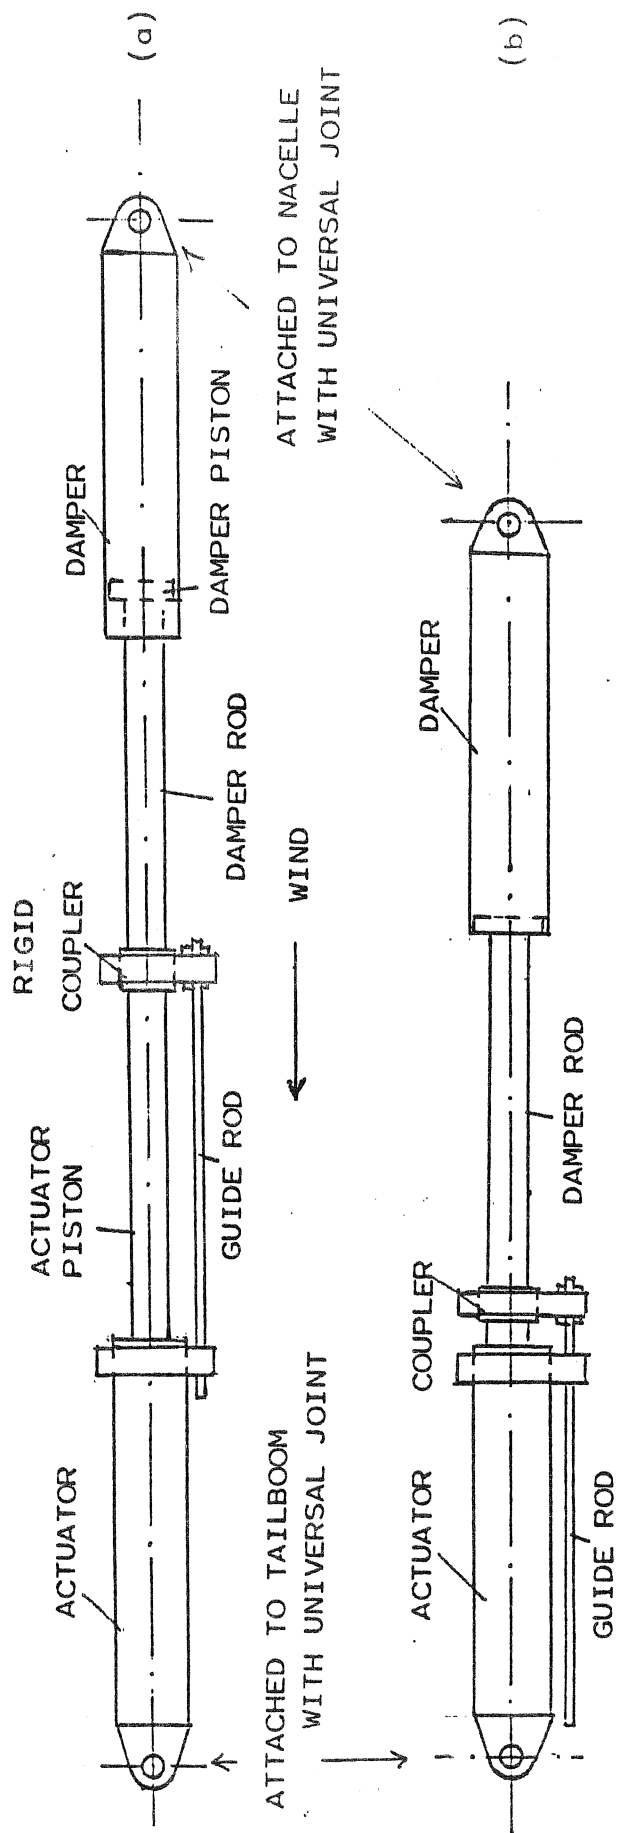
ACTUATOR-DAMPER UNIT (a) OPERATING CONDITION (b) EMERGENCY FURRED
